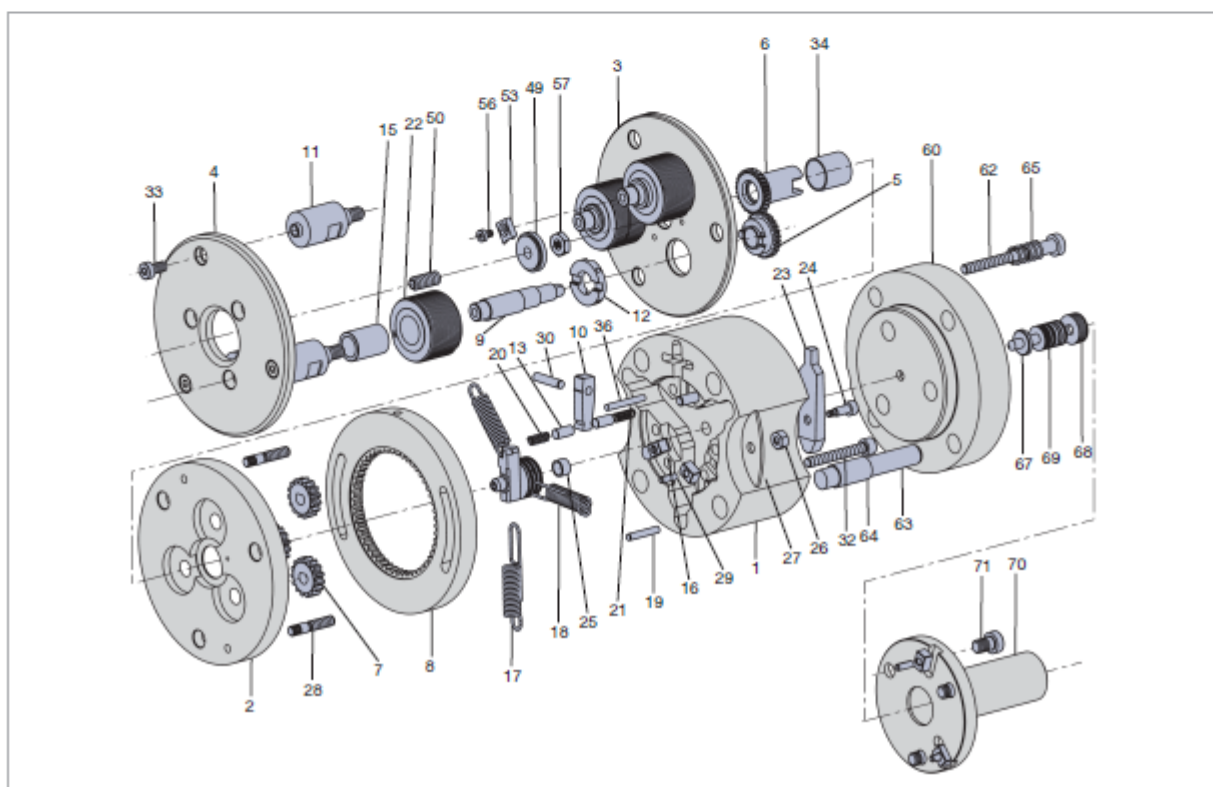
Exploded view, spare parts EW23A00 and EW23A01
